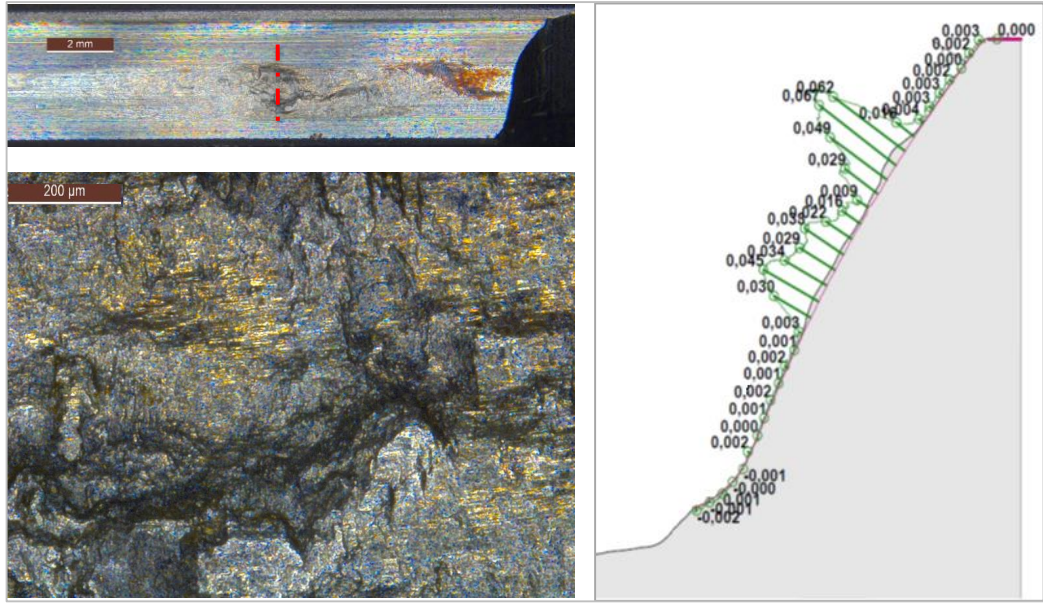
Optical Microscope images and profilometer scanning of a damaged spline coupling tooth.
